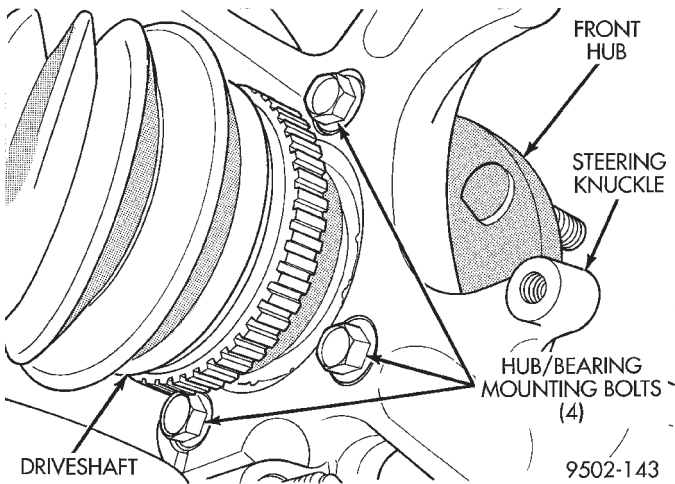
Hub/Bearing Assembly Mounting Bolts
